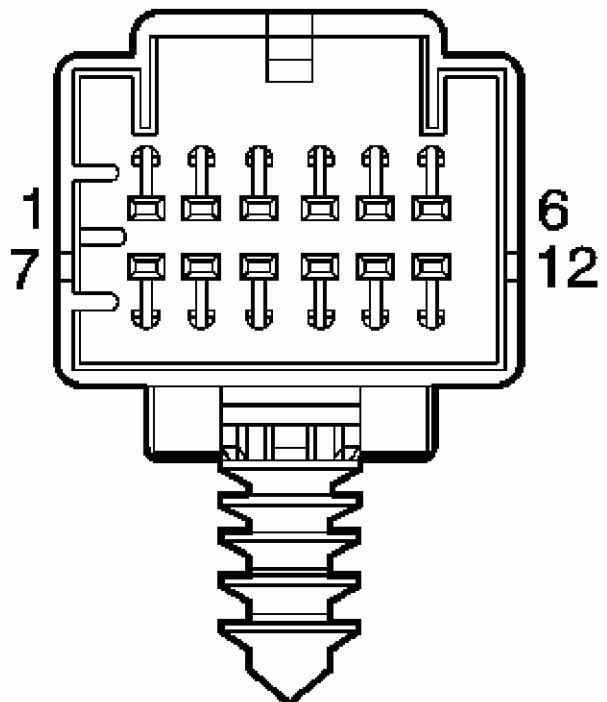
Outside Rearview Mirror - Passenger C1 Connector End View
